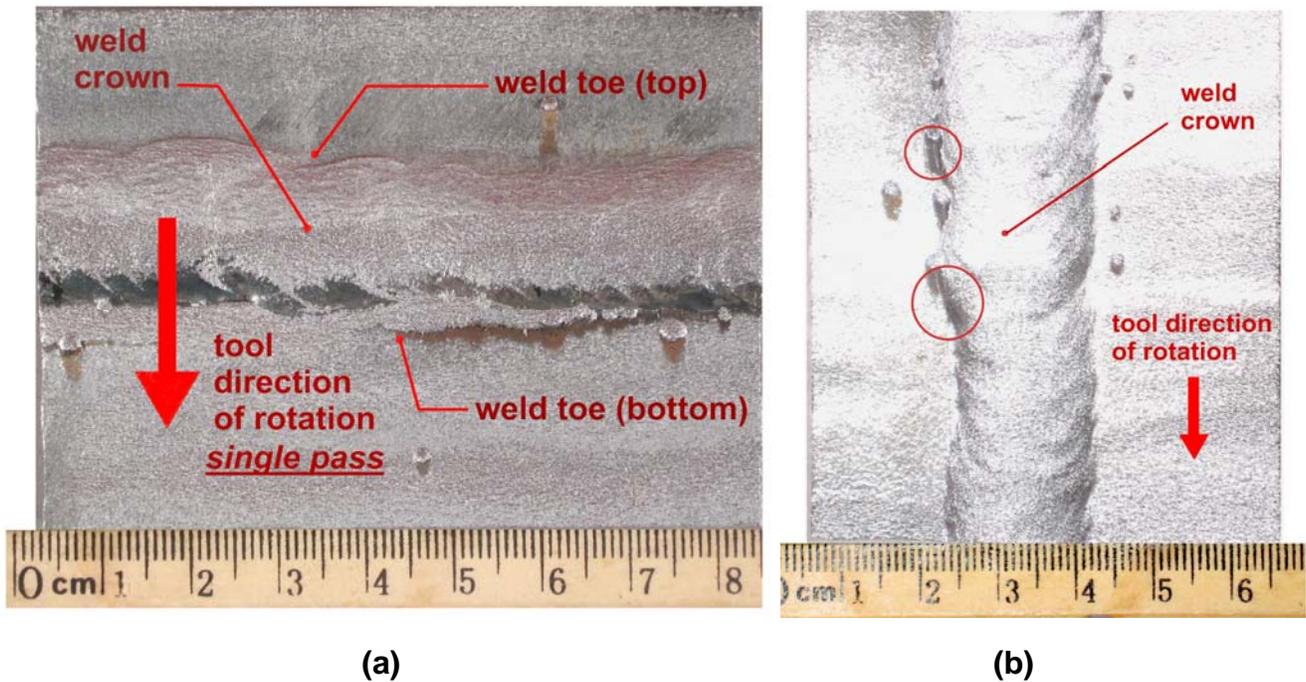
(a) Surface obtained by using single-pass of bristle blasting tool in direction (a) parallel to weld bead, and (b) perpendicular to weld bead.
